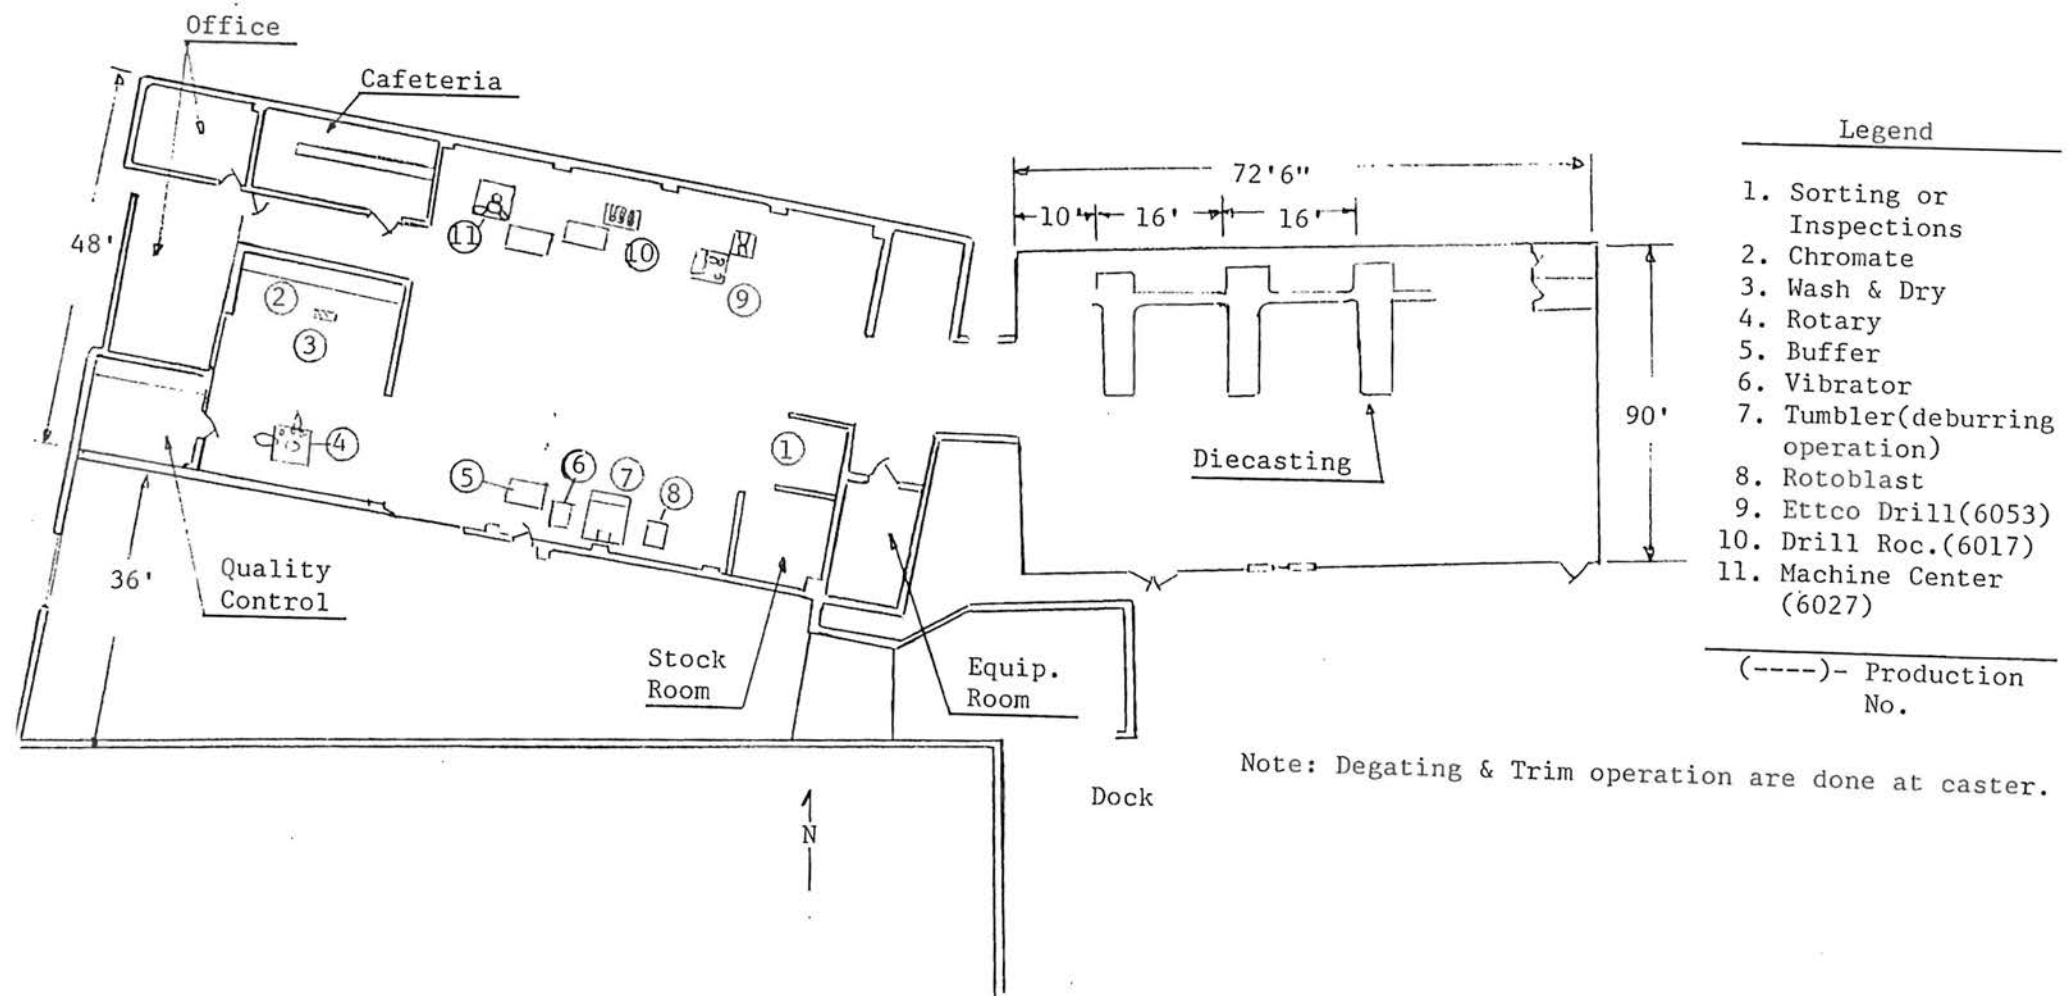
EXHIBIT E: MAGNESIUM PLANT LAYOUT
